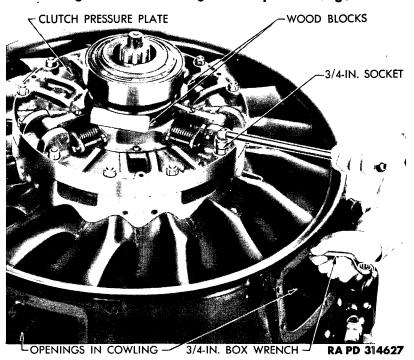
Removing Clutch Pressure Plate Retaining Nuts
